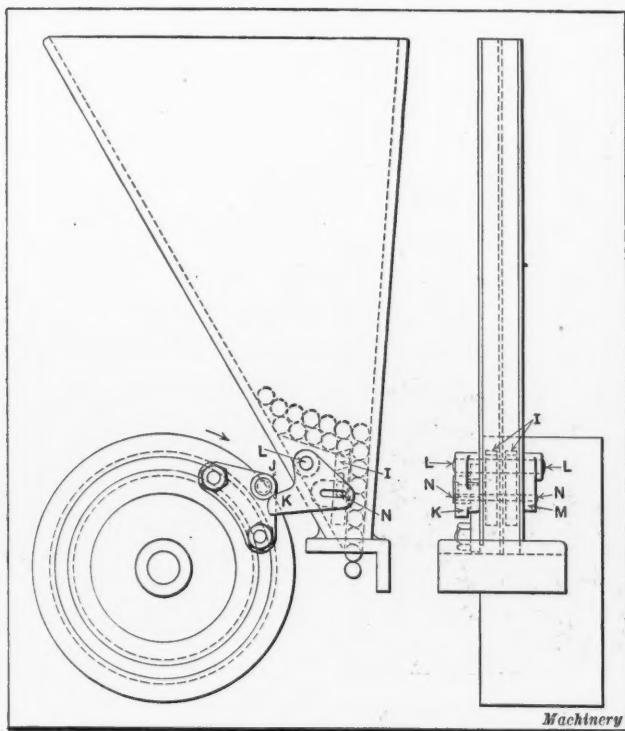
Agitator which keeps Chain Bushing Blanks running freely through the Magazine shown in Figs. 1 and 3
